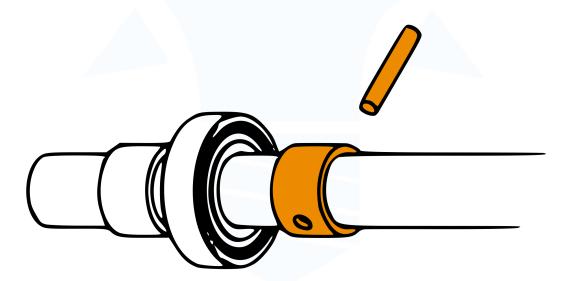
Bearing seat and safety bolt on the shaft.
